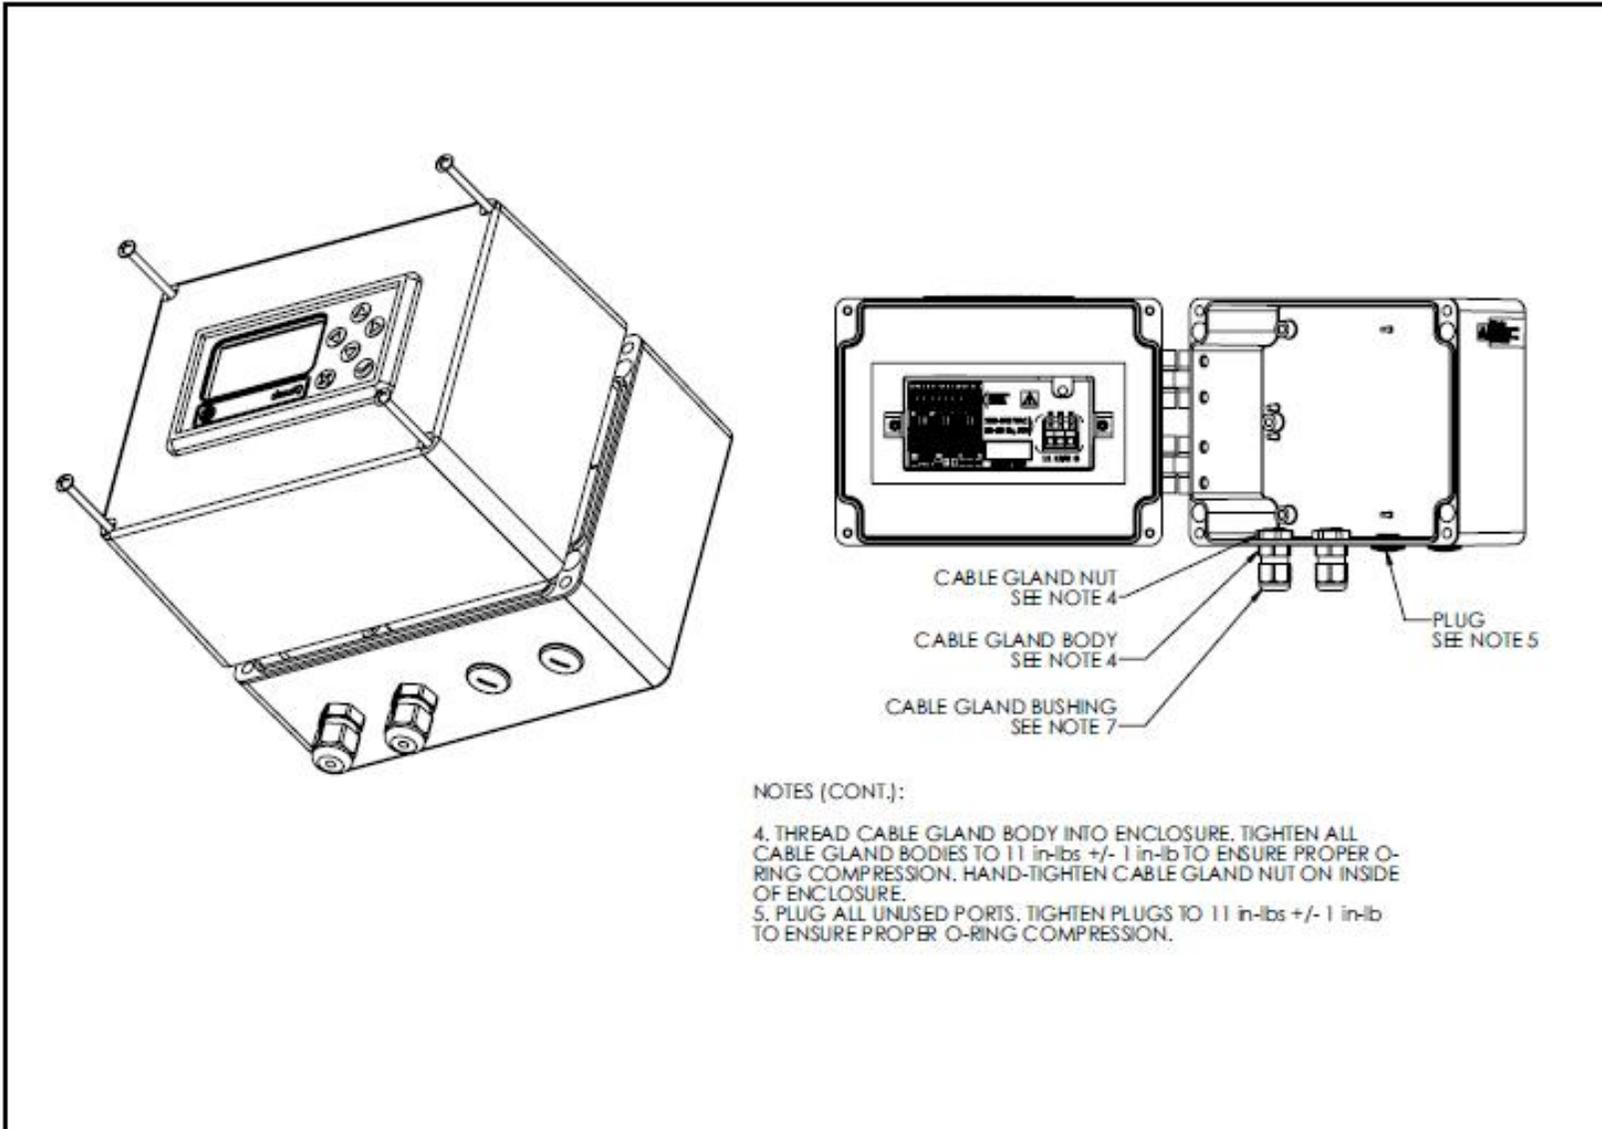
Wall Mount Outline & Installation (ref. dwg 712-1823, 3 of 3)
